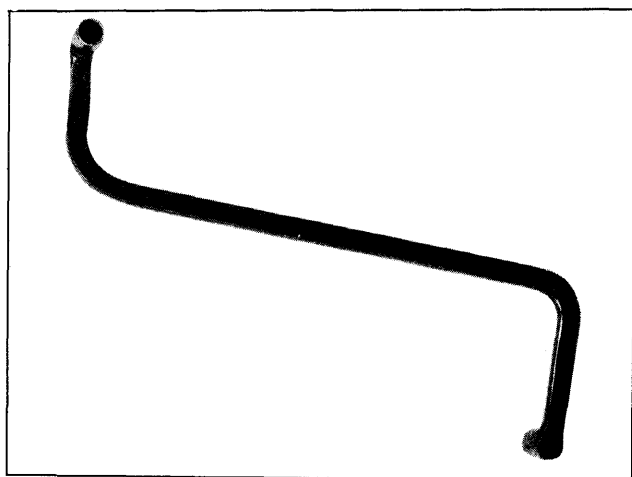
Front Door Hinge Tool J-22810 - "A" Styles
